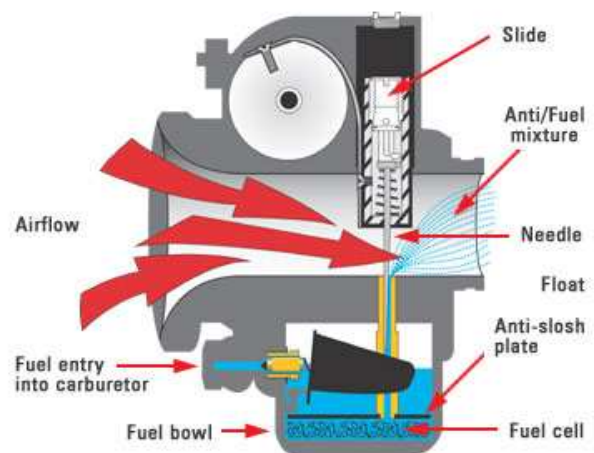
carburetor – needle regulates the amount of fuel that is exposed to the air stream [2]
